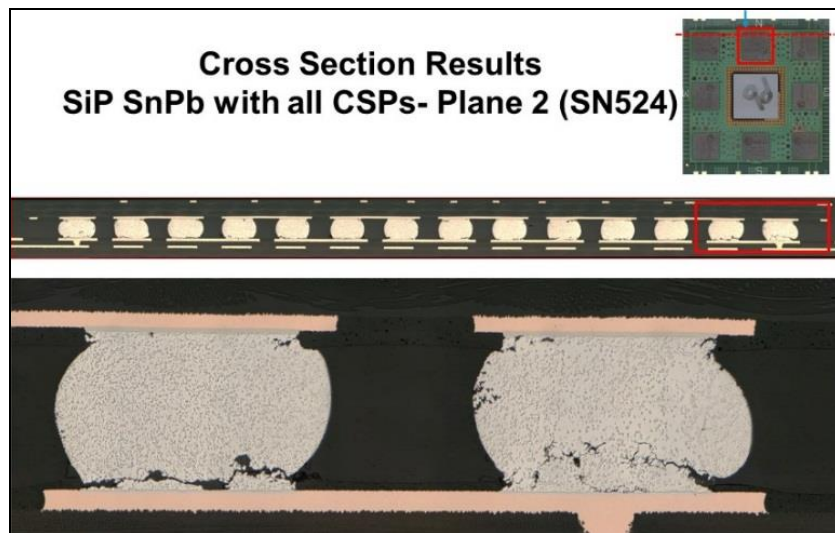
Representative of optical microscopy of SnPb SiP after 2838 cycles (-40°C to 125°C) showing signs of full cracking at a number of solder joints.
